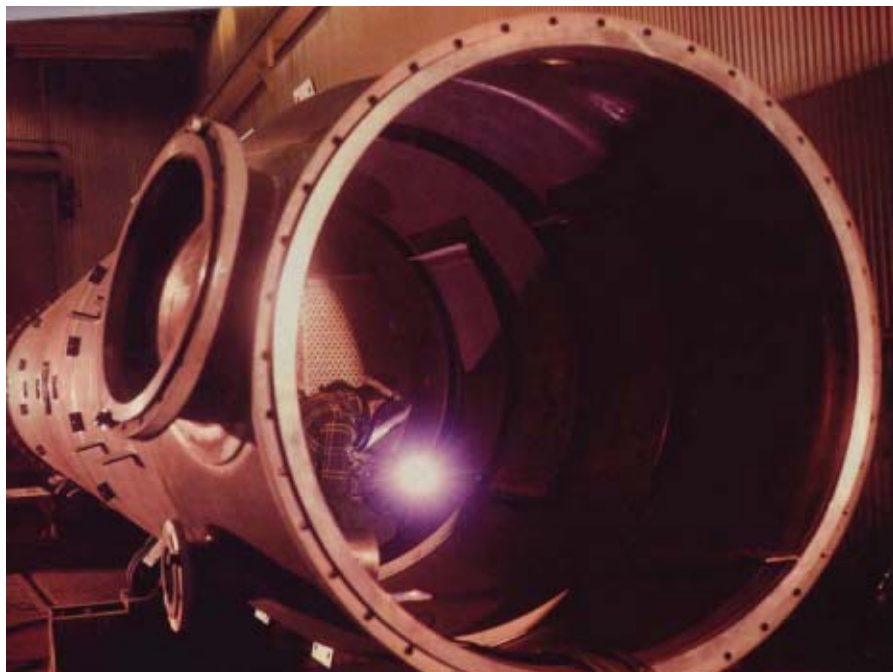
Welding on a pressure vessel at Nooter Fabricators in St. Louis.
